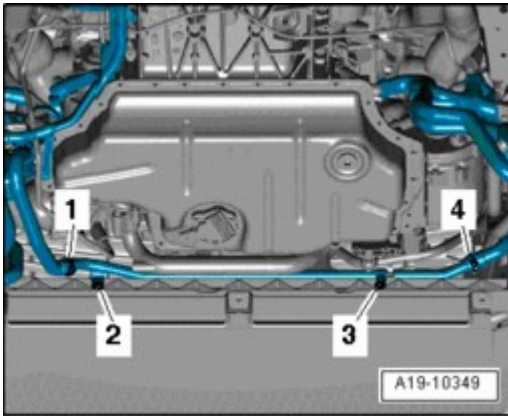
Screws, Front Lower Coolant Pipe & Hoses
